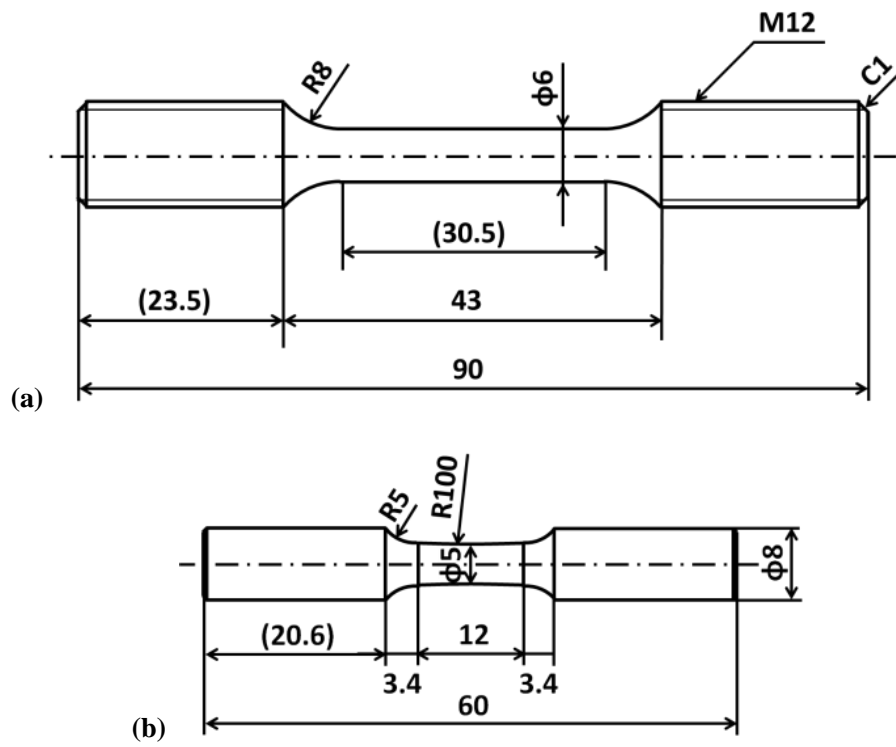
Shapes and dimensions of specimens (unit: mm): (a) tensile test specimen;
